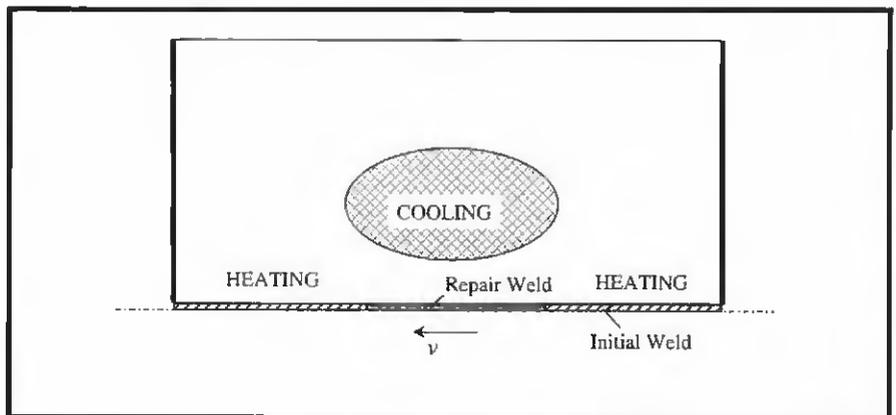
Thermal stretching technique for repair welding.
